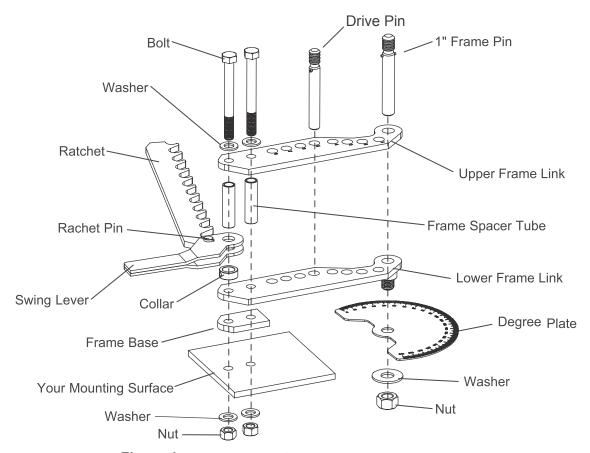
Exploded view of the Frame Assembly with Degree Plate
